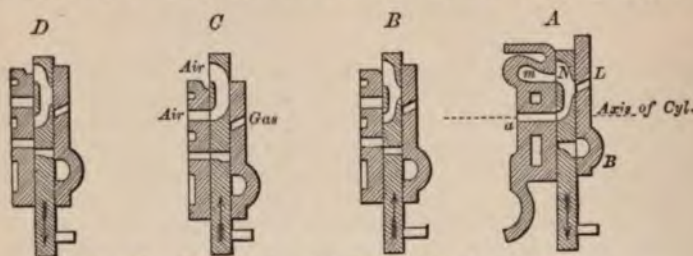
Otto Engine—Positions of Ports and Passages.
